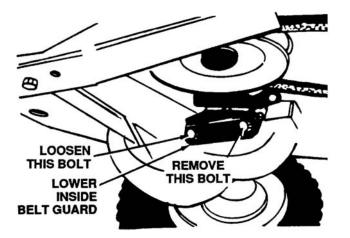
Removing Hex Bolt From Lower Inside Belt Guard
